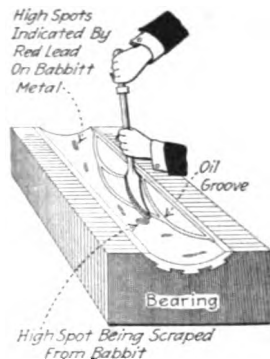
Illustrating method of scraping high spots from a bearing quarter.
